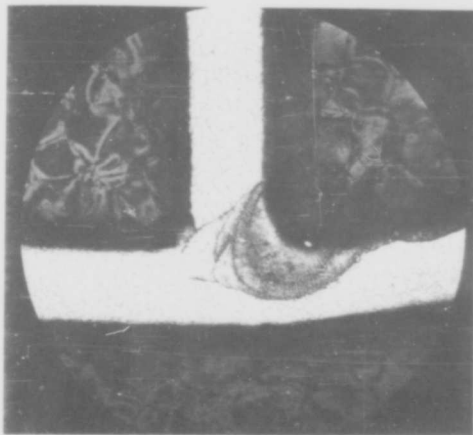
Photomicrograph of Electron Beam Welded T-Joint of D-36 Columium Showing Grain Refinement in the Weld Zone (75X)
